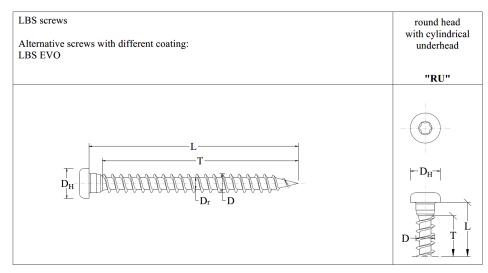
LBS AND LBS EVO FULLY THREADED SCREWS
